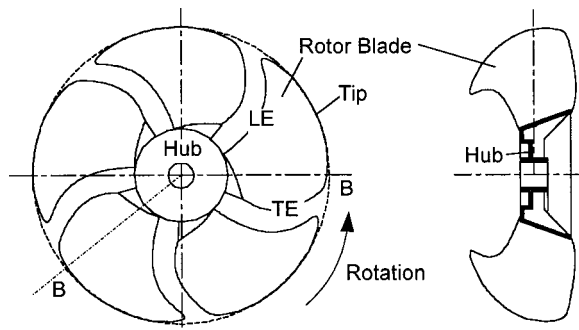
Schematic view of test propeller fan rotor: Front view (left) and side view (B-B) (right)
